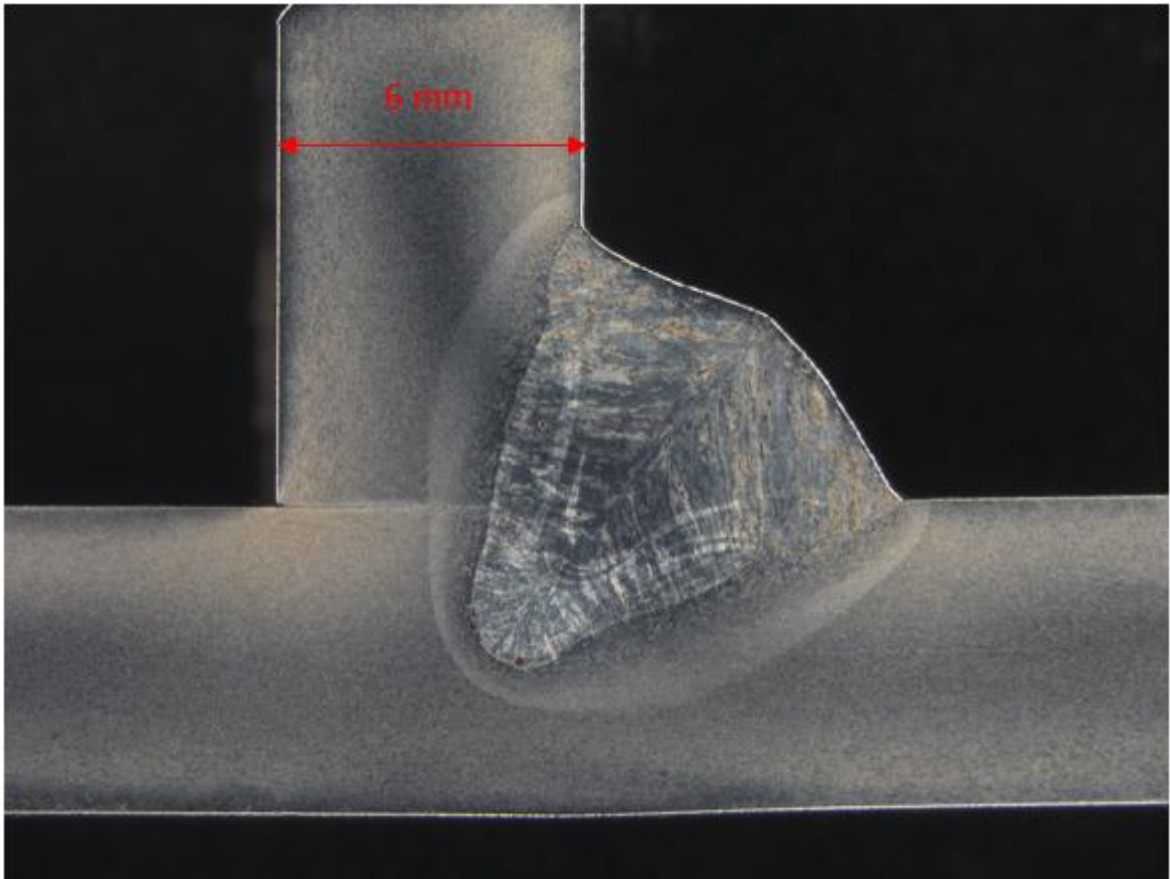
Macro image of WiseSteel default parameters weld bead
